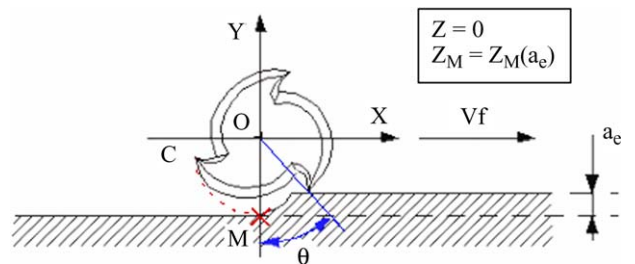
A tooth cuts into the material at tool tip while point M is still milling at $Z = Z_M$.
